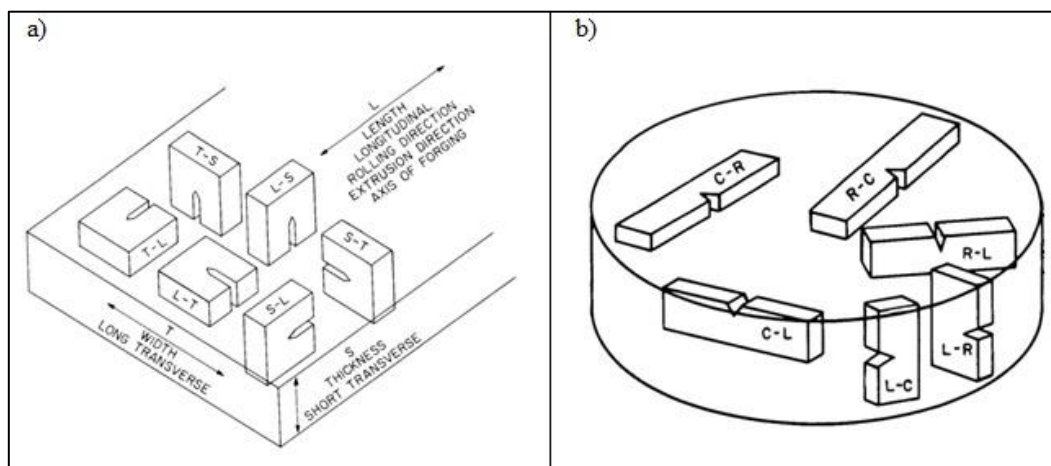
Fracture toughness specimen orientation for: a) rolled plates and forgings and b) cylindrical tubes and bars [12].
